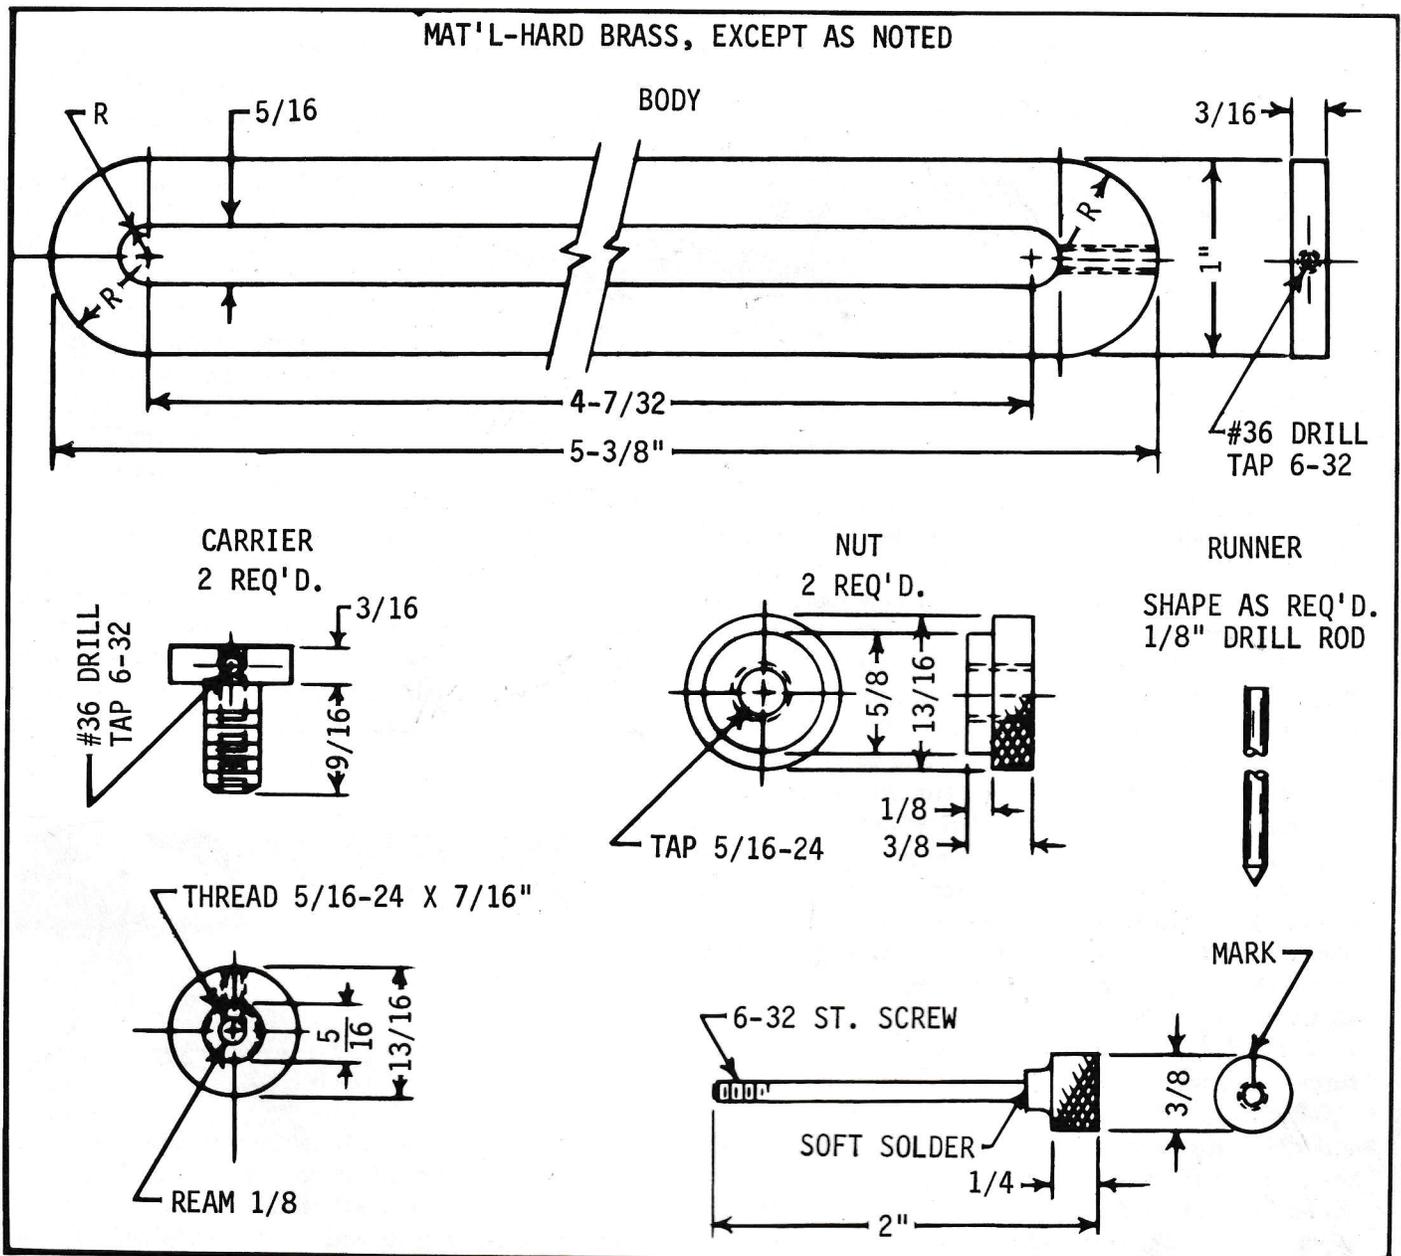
THE PINION HEAD DEPTHING TOOL
